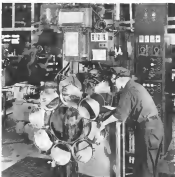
Seam welding visually inspected on Pratt & Whitney Aircraft J-57 jet engine compressor duct assembly. Note clamps fixture used.
